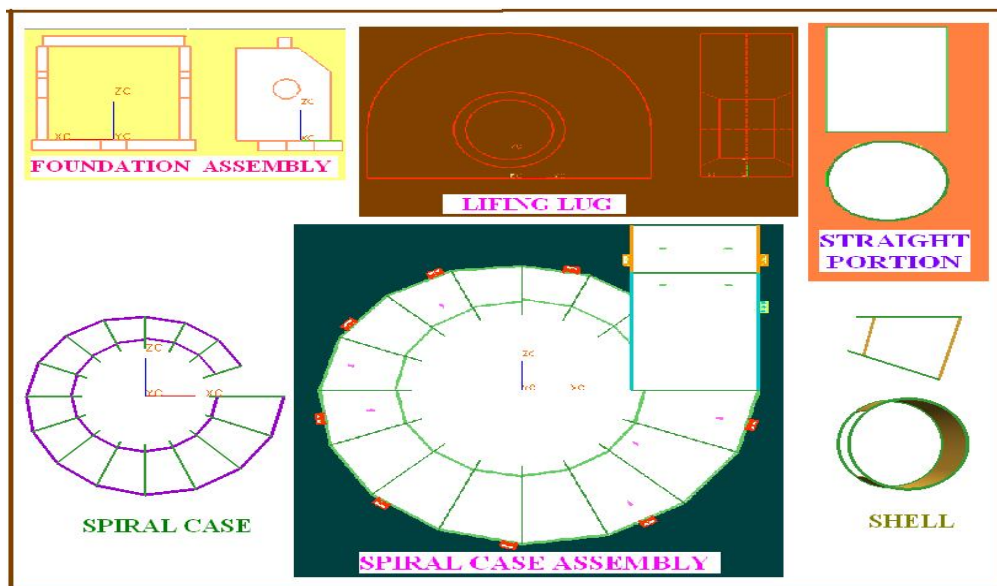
2-D drawings of Spiral Case Assembly and Sub Assemblies.
